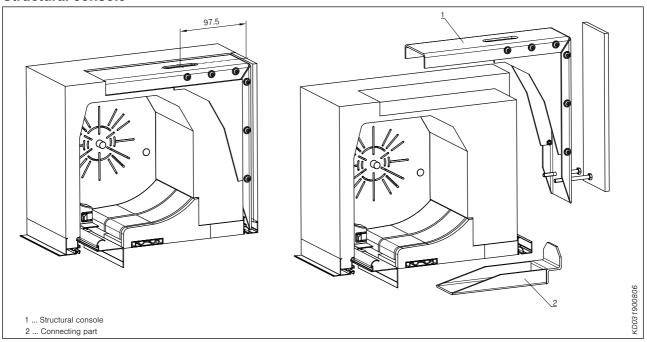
Structural console for NA-RA and NA-RO, inspection from outside
